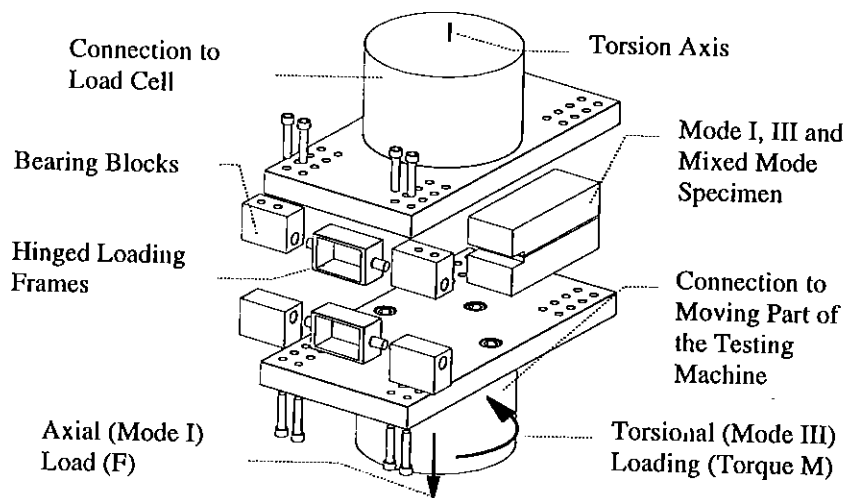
Exploded view of loading device for mode I, mode III and mixed mode fracture tests.
